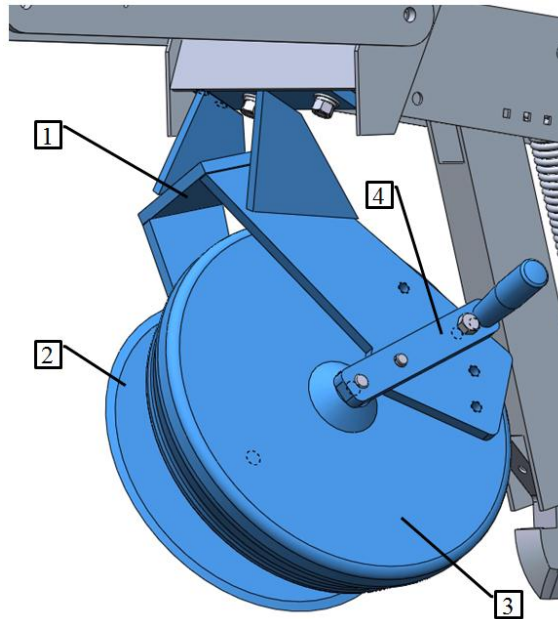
5-Furrow opener assembly parts, 1) Disc holder, 2) Disc, 3) Gauge wheel, 4)
